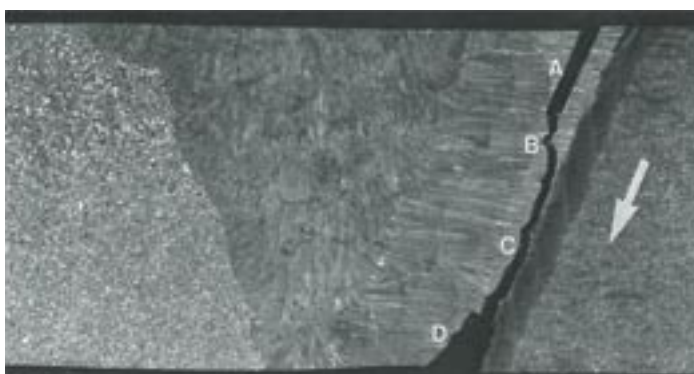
Post-test cross-section from the BIMET-02 mock-up: location A is the implanted notch, B-C is the crack extension during the test and C-D is where the pipe was split open after the test for destructive examination
